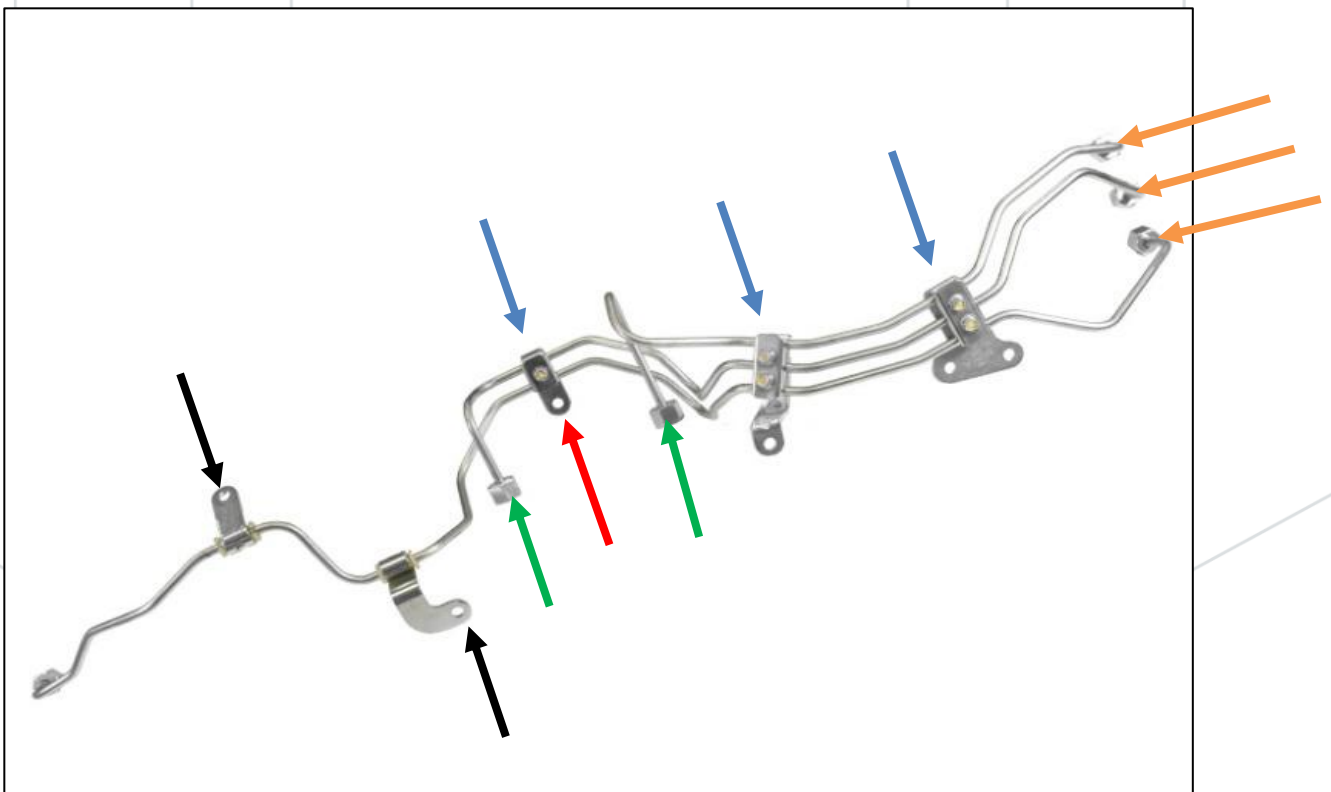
High Pressure Line Assembly Nut and Bolt Locations
